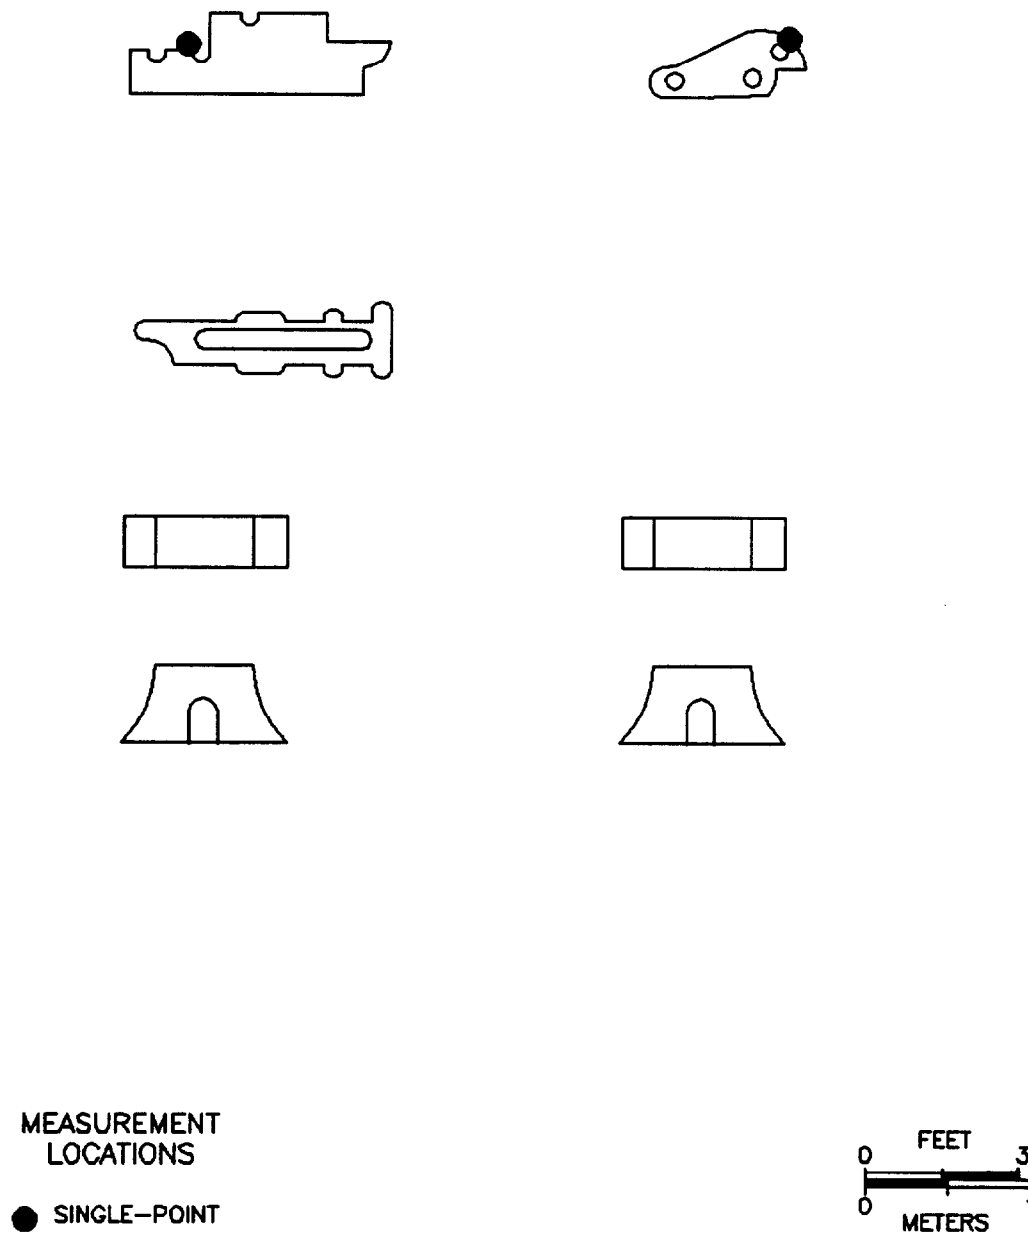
Building 30, Fabrication Room, Parts of Shear #33988 – Measurement Locations
